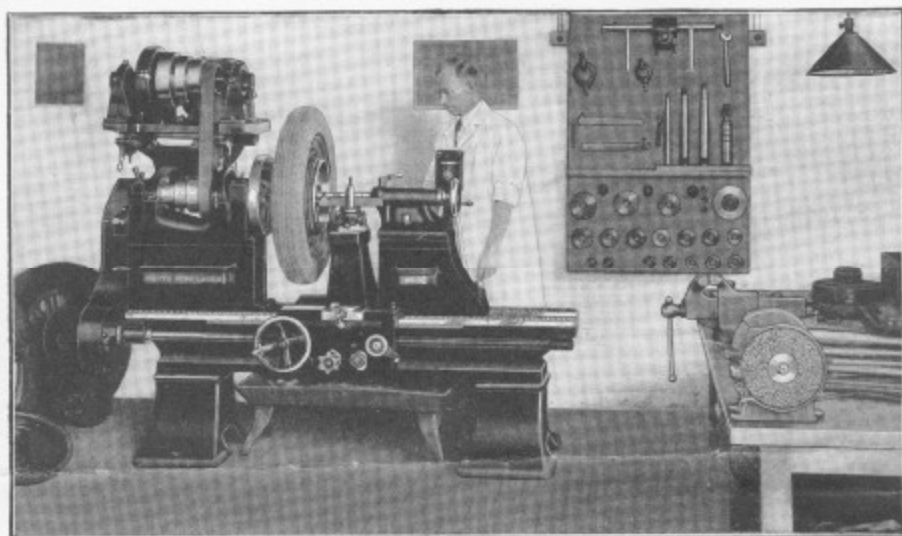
The No. 36 Automotive Service Shop in Use on Brake Drum, Flywheel and General Wheel Servicing.
